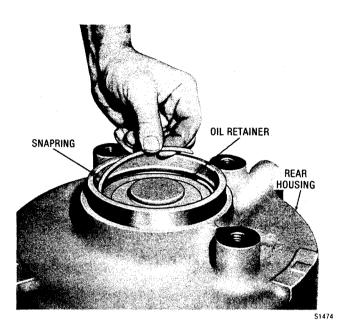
Installing oil retainer snapring (TRT-1)
